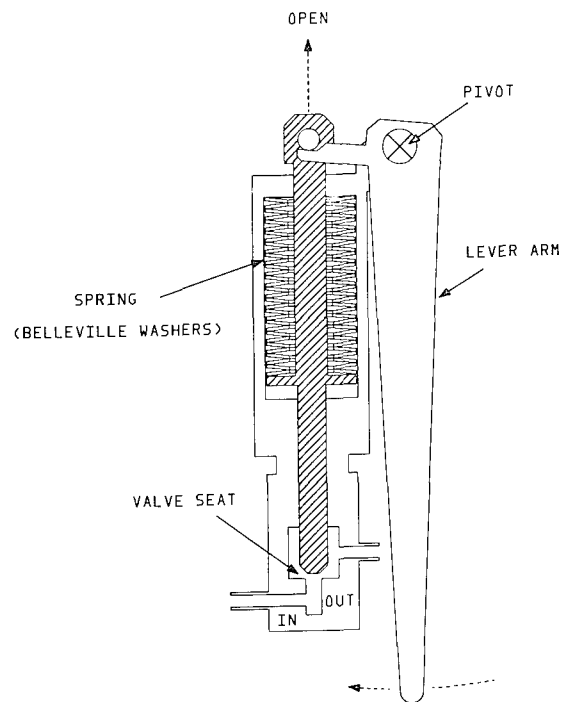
Valve Actuation Showing Spring and Lever Mechanism
